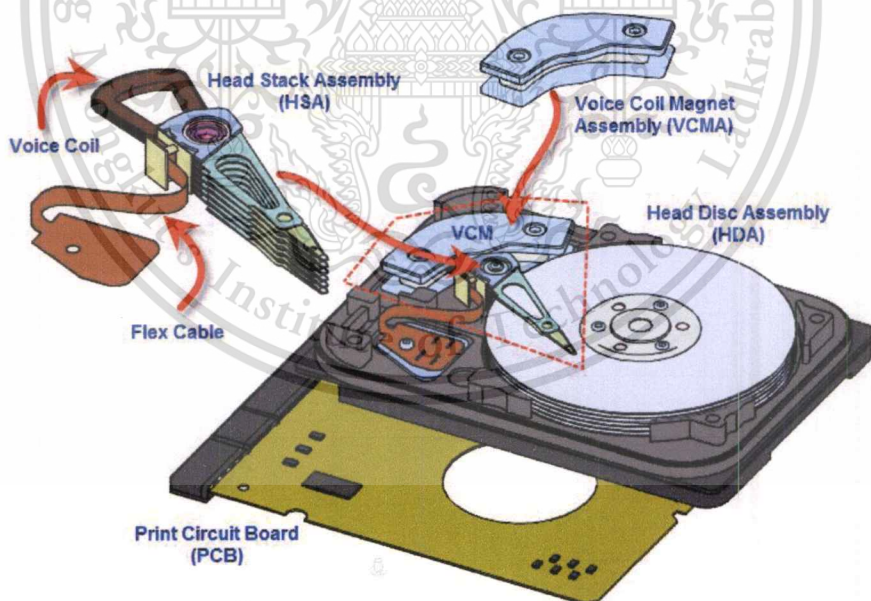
Head Stack Assembly (HSA) and VCM Magnet in HDA [9]
